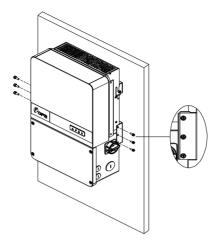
Secure the Main Enclosure and Wiring Box to the Bracket
